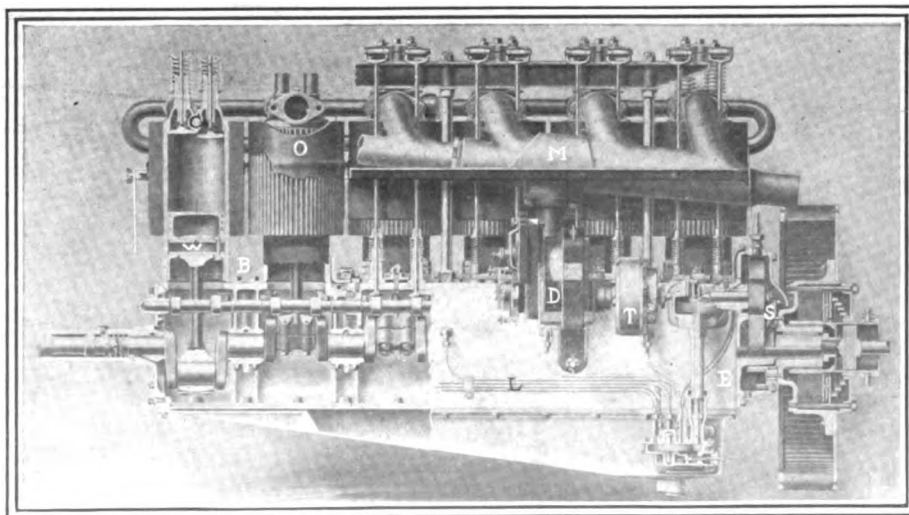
Longitudinal view and part section of Franklin air-cooled motor
